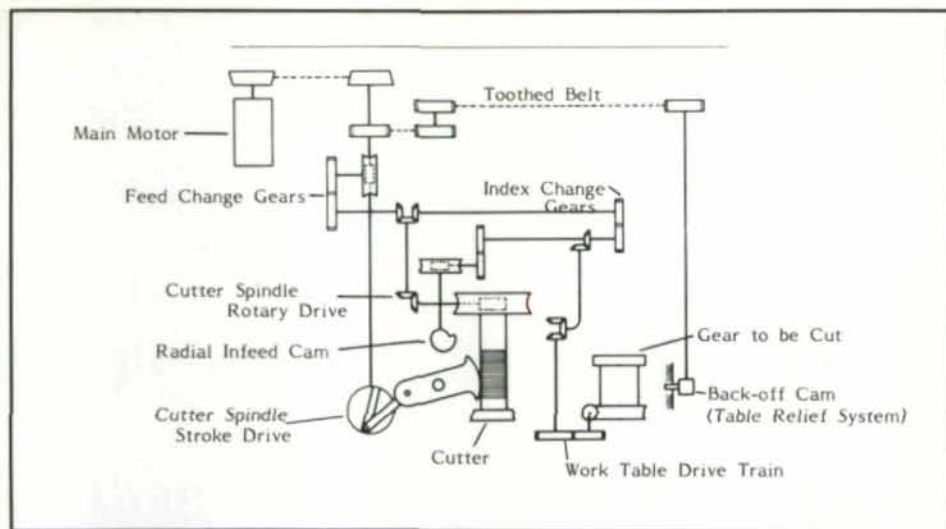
"Old Style" table relief machines with numerous drive trains necessitated by having a single drive motor.
